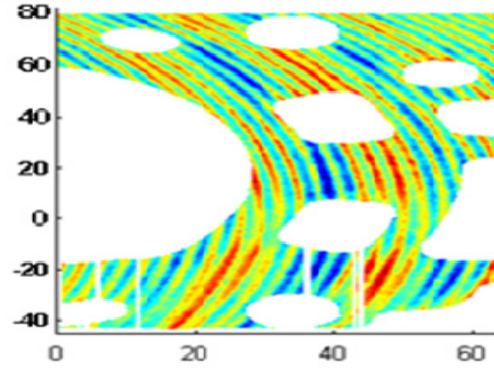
Machined surface captured by LHI with clear toolmarks [52]
